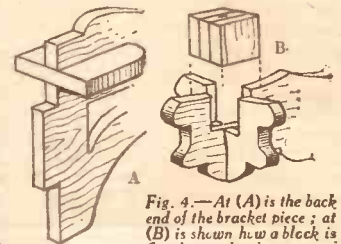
At (A) is the back end of the bracket piece; at (B) is shown how a block is fitted to take the screw of the candle holder.
